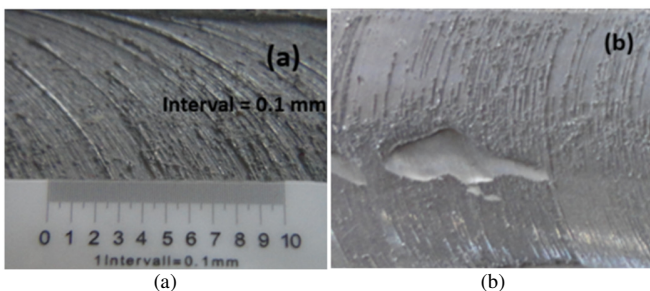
Appearance of welded joint produced by 140 mm/min with: (a) 800 rpm and (b) 400 rpm.
